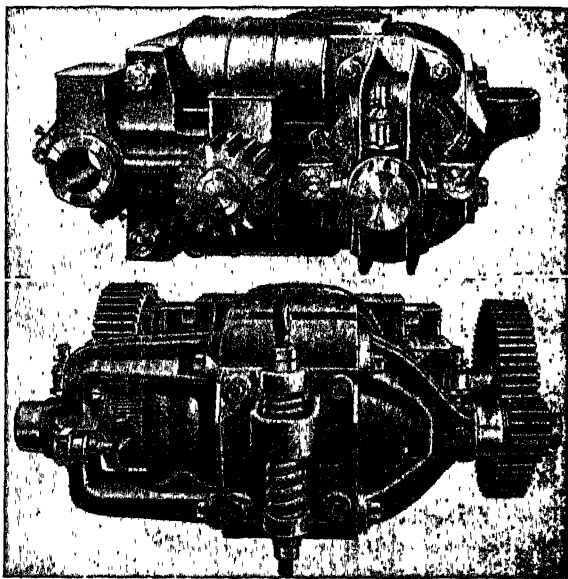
SPRAGUE DOUBLE REDUCTION MOTOR 1889
